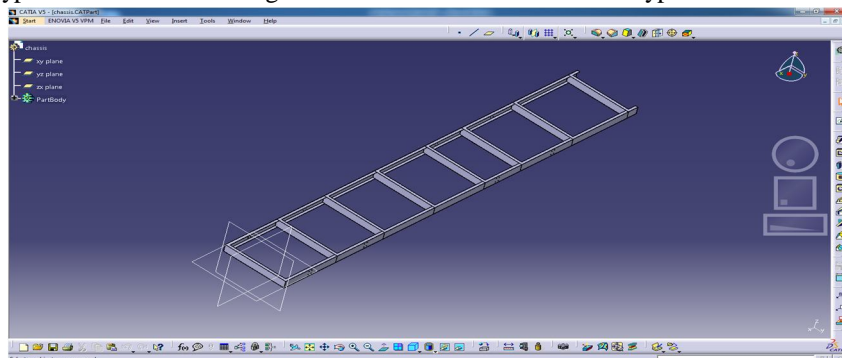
Heavy Duty Chassis with C Type cross Section.
